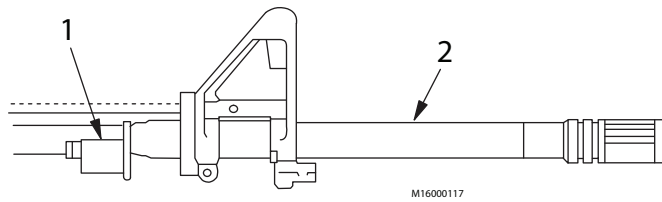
Removal of Barrel Stop Assembly (M16A3 and M16A4).
